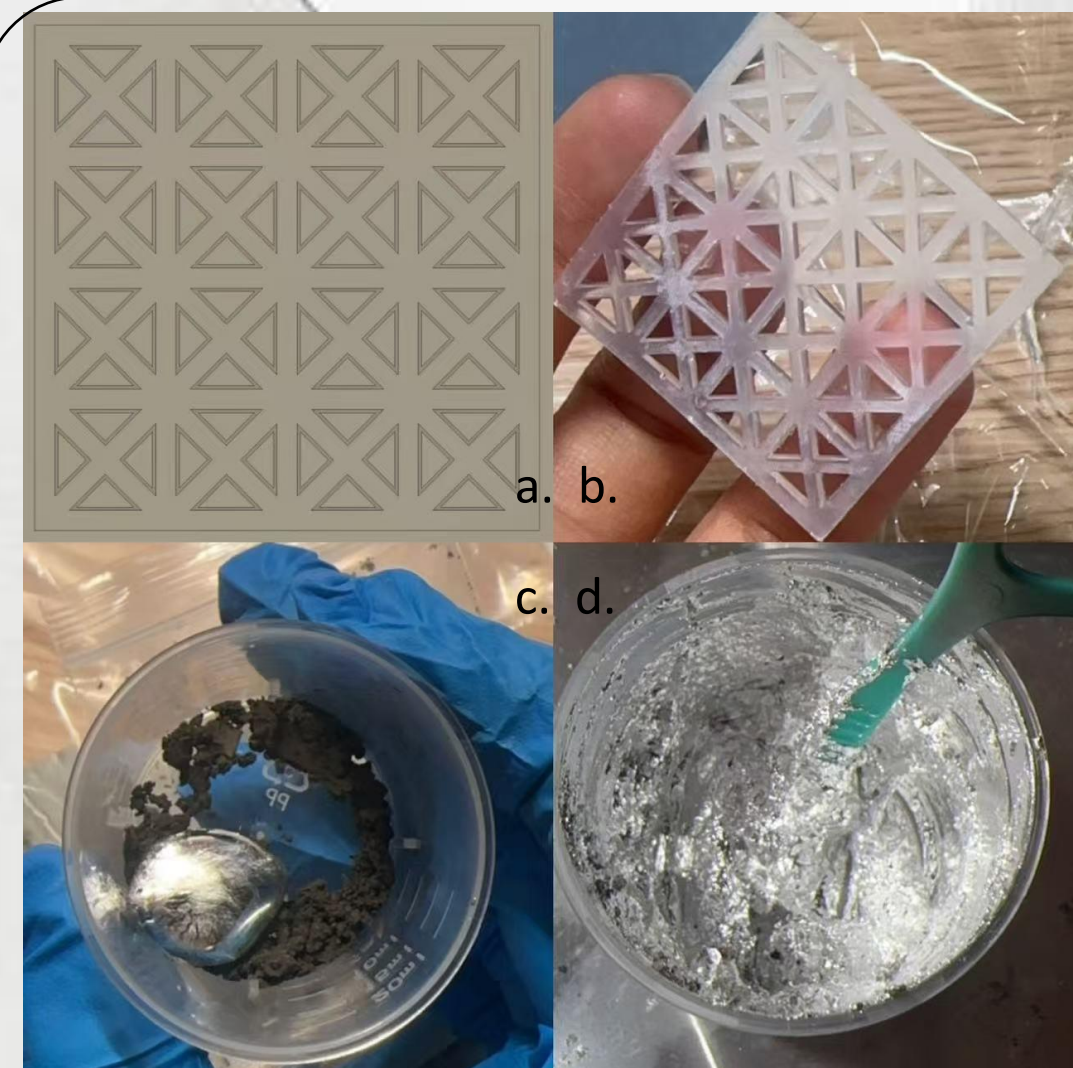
Materials: (a) CAD ,(b)Silicone soft mold, (c) NdFeB and Gallium, (d) magnetic mixture
